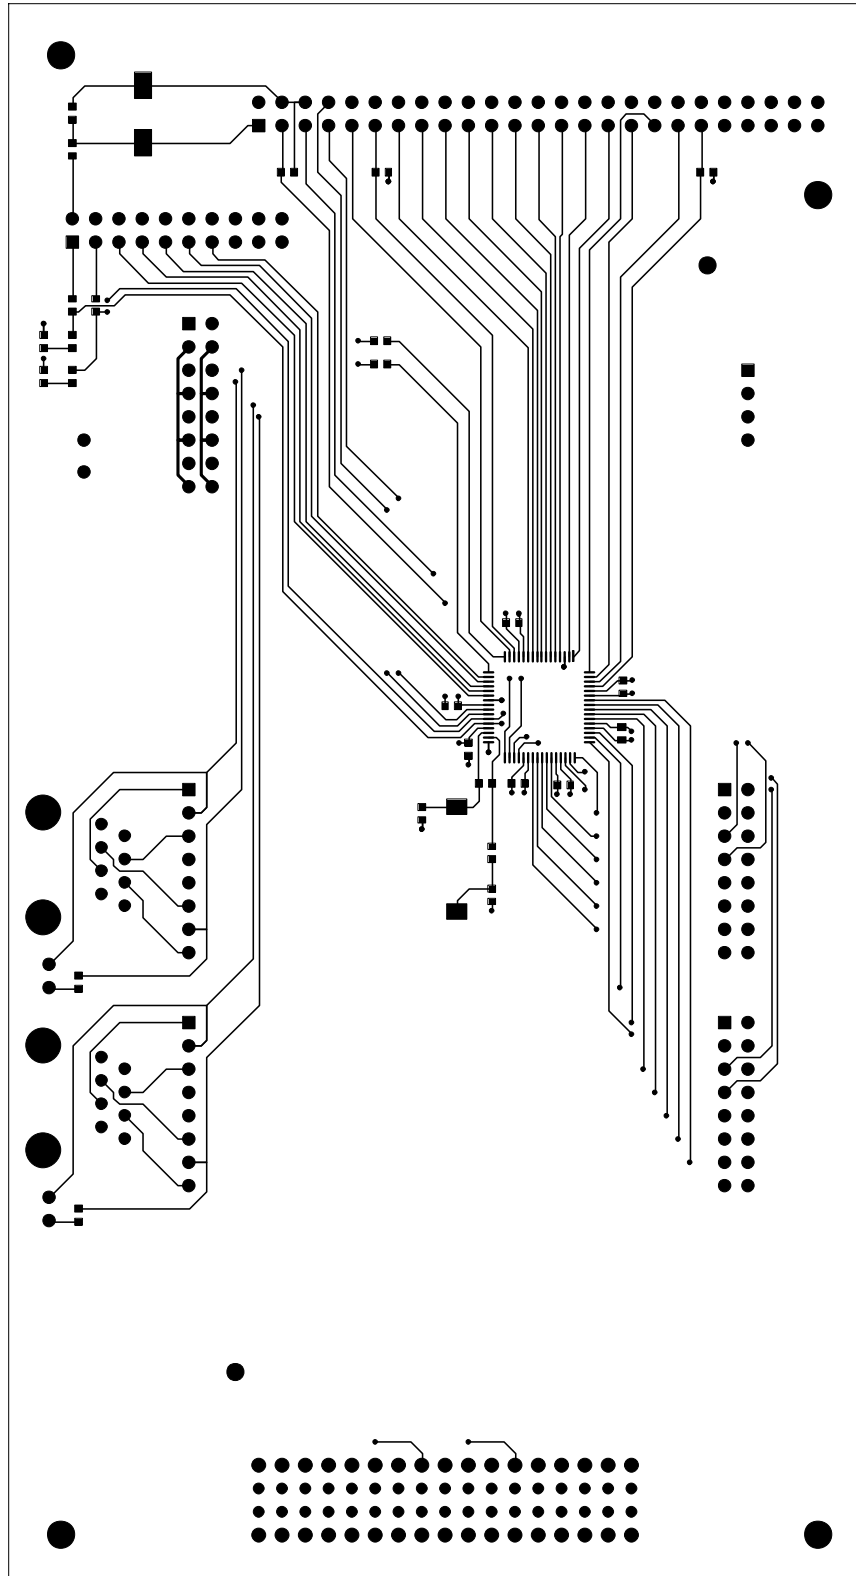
XHFC-2SU Evaluation Board board (top side traces)
